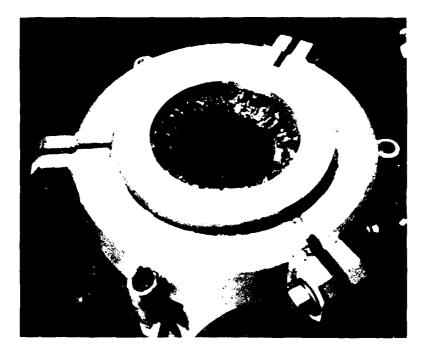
Sealing of the 7.75-inch-diameter disc window in the test fixture with 3M Windo-Weld mastic tape.
